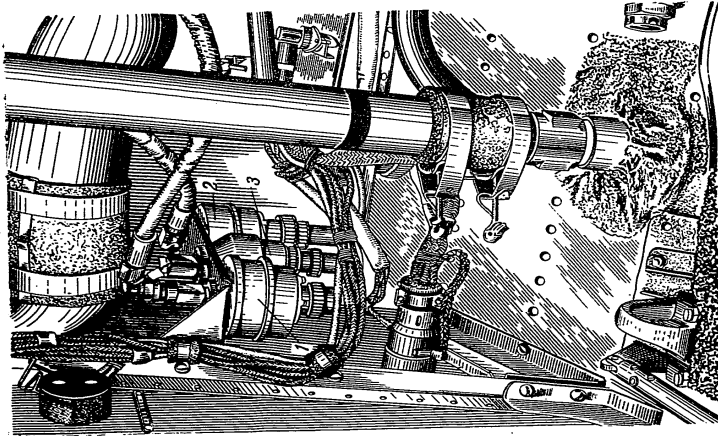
OIL AND FUEL PRESSURE GAUGE TRANSMITTERS INSTALLED ON FIRE BULKHEAD (for starboard engine)
